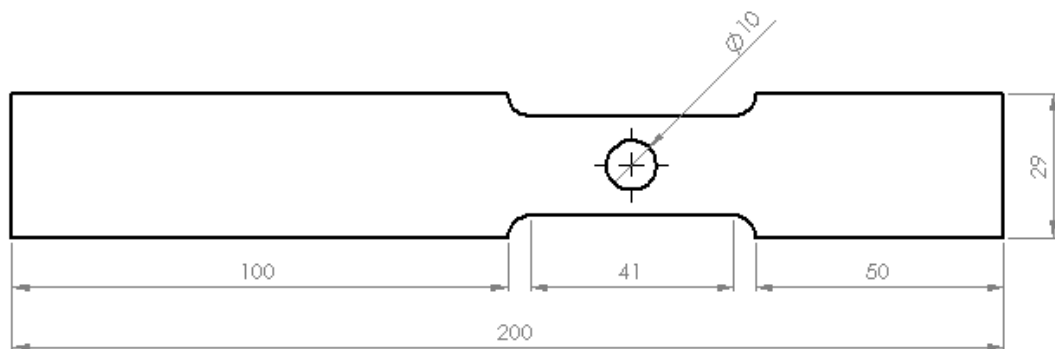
Geometry for a high strain rate uniaxial fracture specimen
